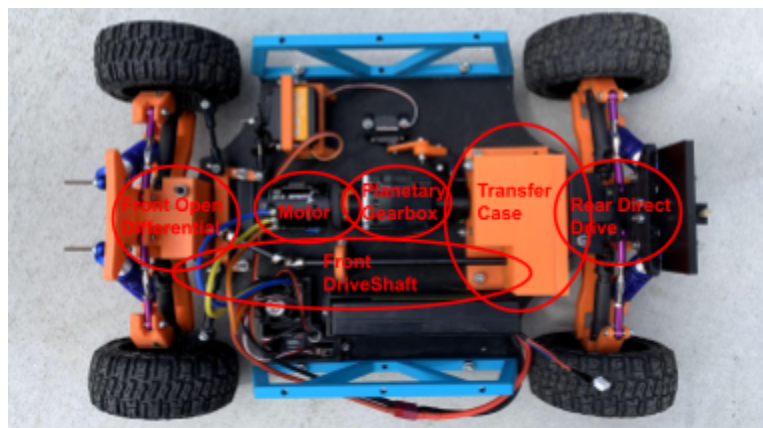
Top Down View of the Final Car with Labeled Drivetrain Components
